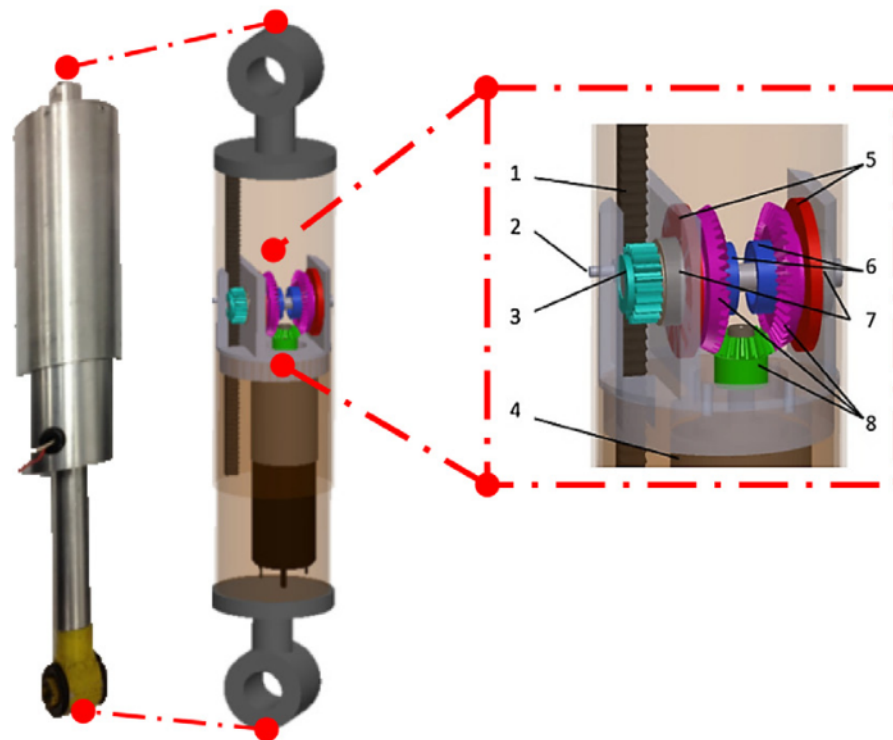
Regenerative shock absorber based on rack-pinion mechanism with MMR proposed in [9]. Rack (1), Roller (2), Pinion (3), Ball bearings (4), Planetary gears and motor (5), Thrust bearing (6), Roller clutches (7), Bevel gears (8).
